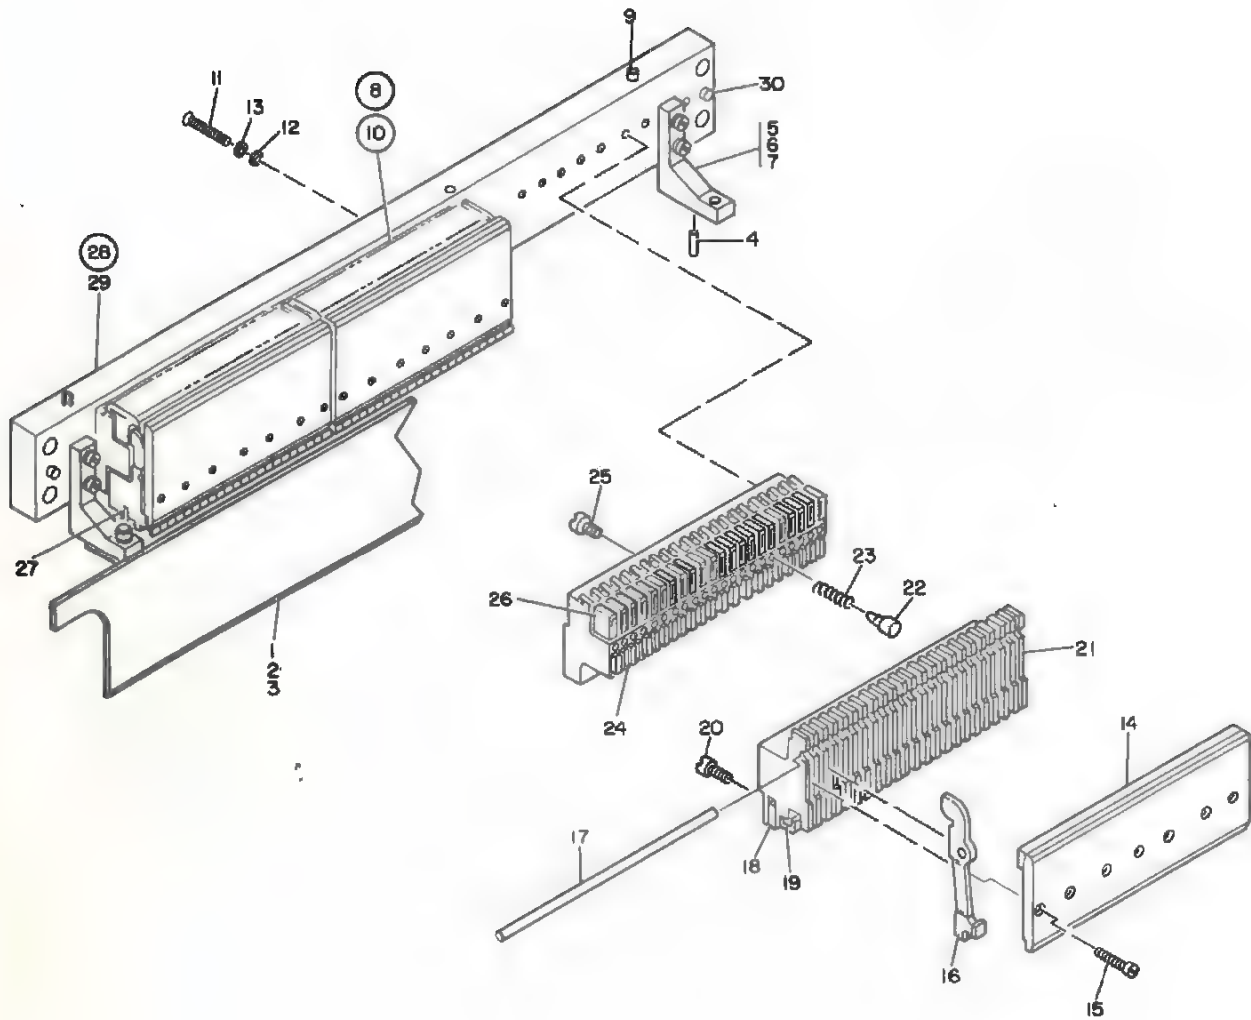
HAMMER UNIT ASSEMBLY, MODEL 1. SEE LIST 6.
